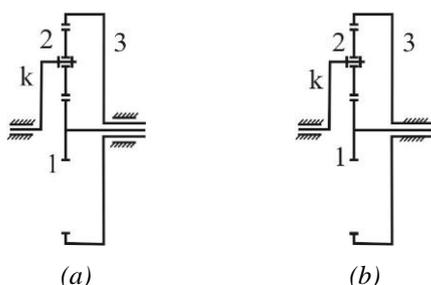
Scheme of epicyclic gear train (a) and scheme of planetary gear train (b): 1 – sun gear, 2 – planet gear, 3 – ring gear and k – carrier
